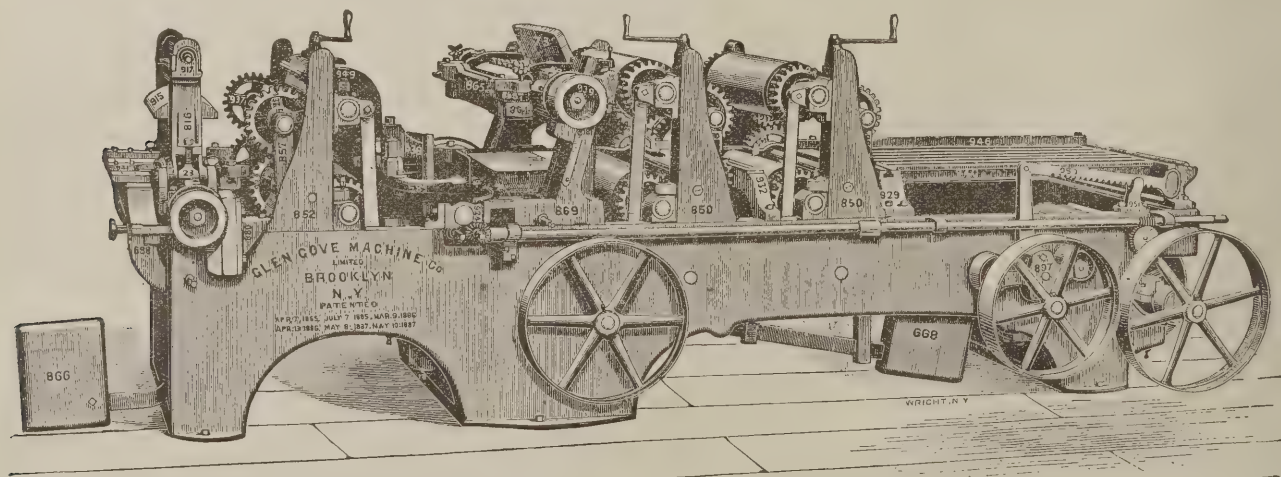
New Surfacer and Matcher Built by the Glen Cove Machine Company, Brooklyn, N. Y.
